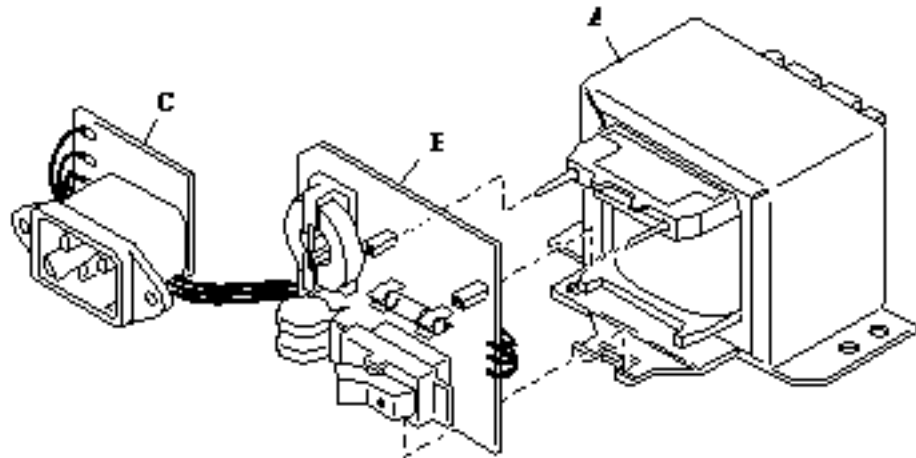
AC Switch Assembly and Power Transformer (2 of 2)
